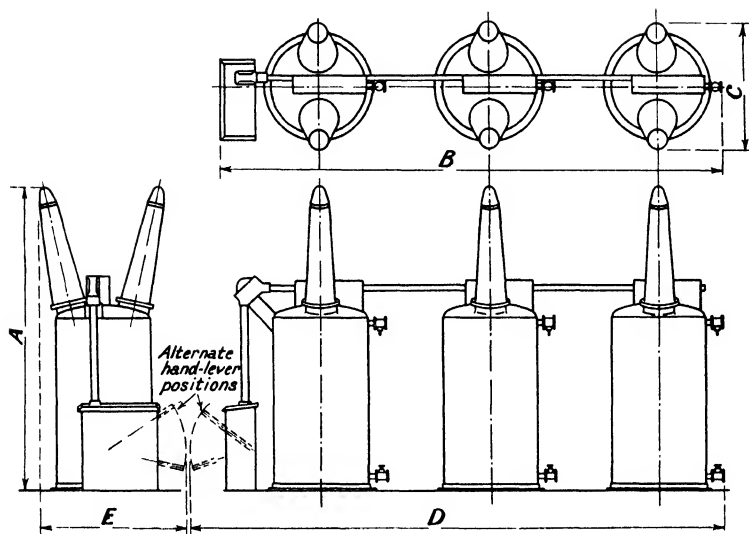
OUTLINE OF FLOOR MOUNTING OIL CIRCUIT-BREAKER
